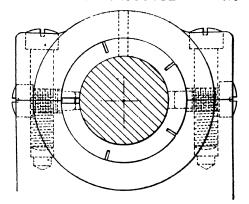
SPLIT BUSH CONTRACTED BY TIGHTENING THE BEARING CAP
